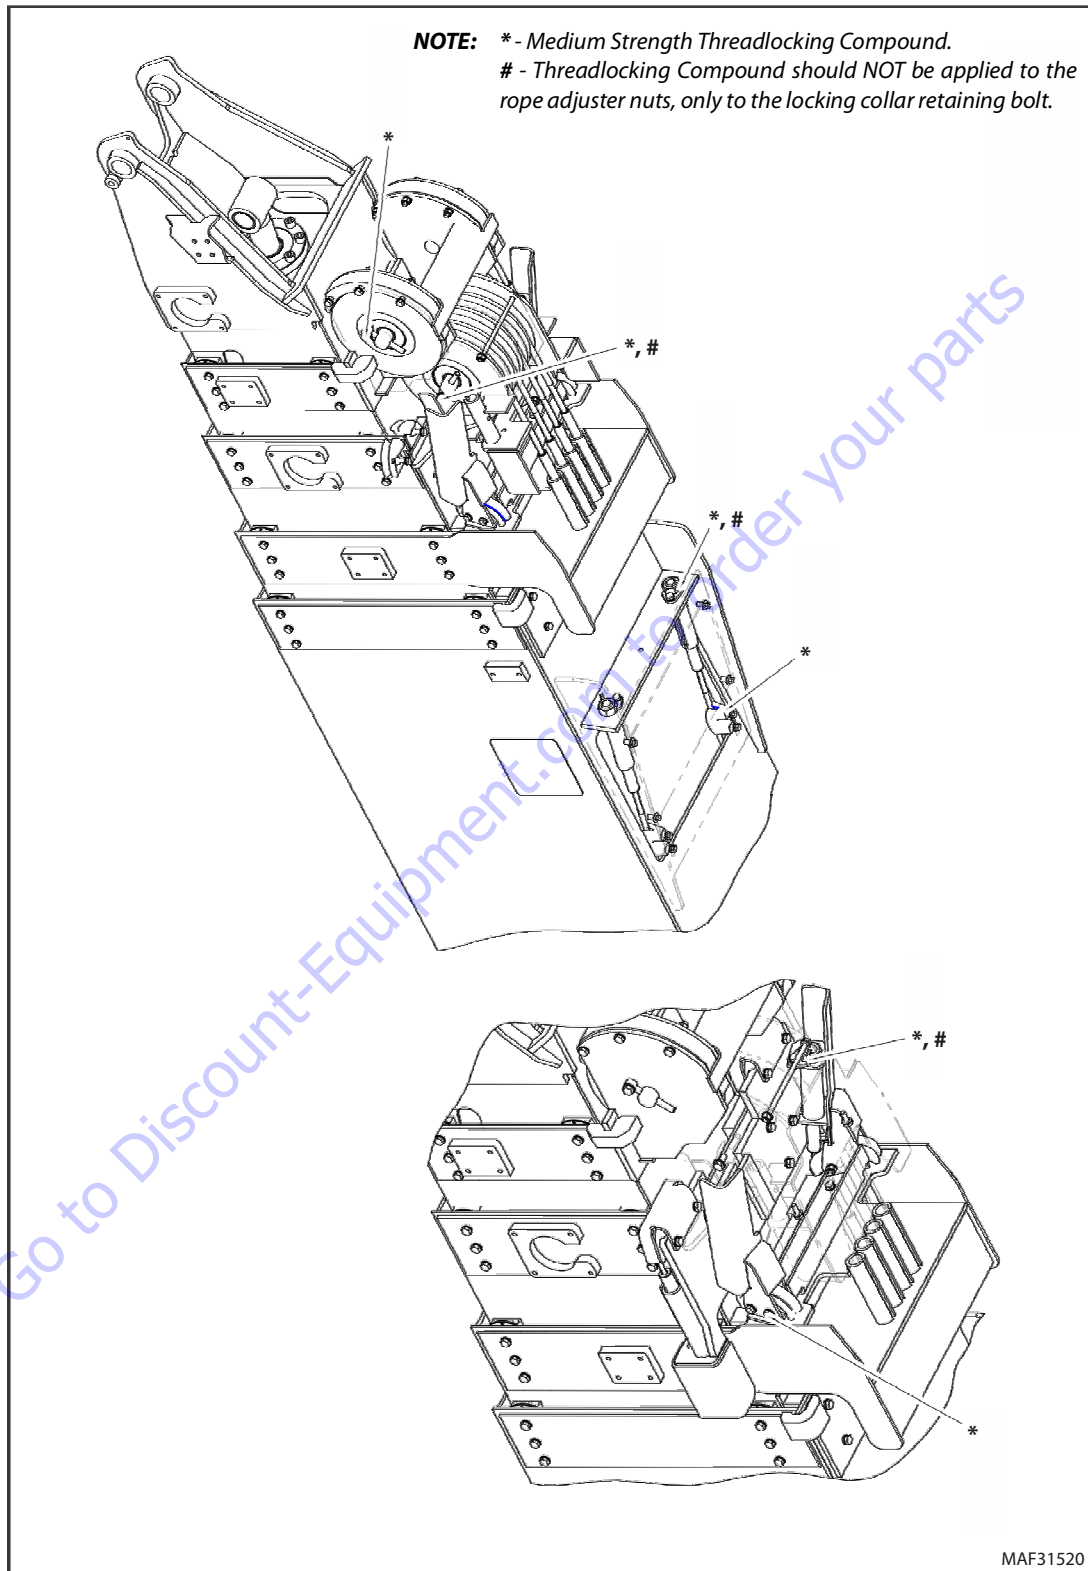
Locations for Threadlocker Application - Sheet 4 of 5
